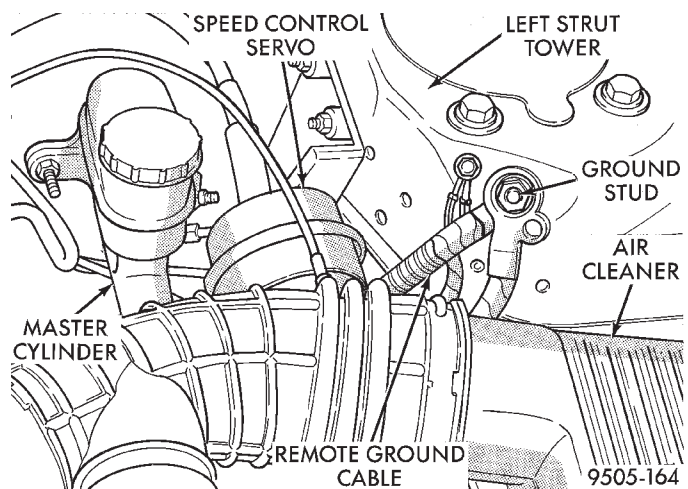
Remote Ground Cable Attachment To Strut Tower
